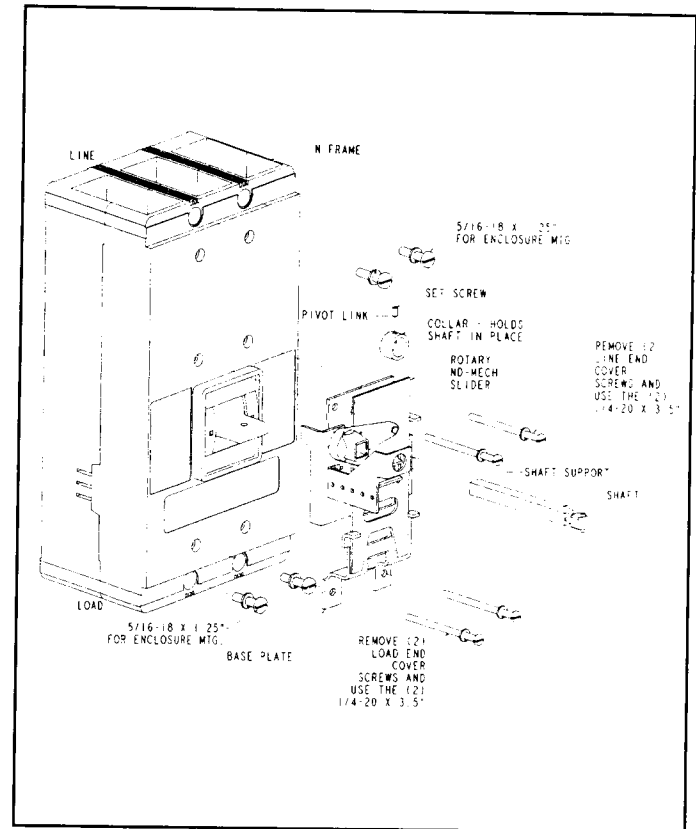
N-Frame Breaker/Mechanism Assembly
